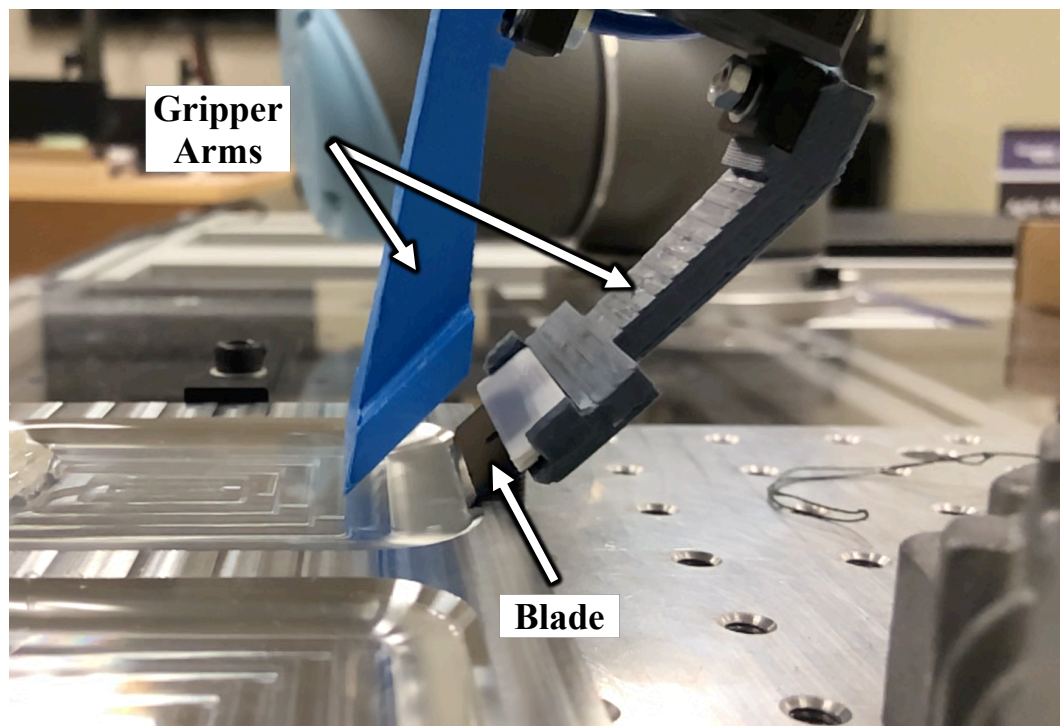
Bladed gripper before peel test on chamfer-walled mold
